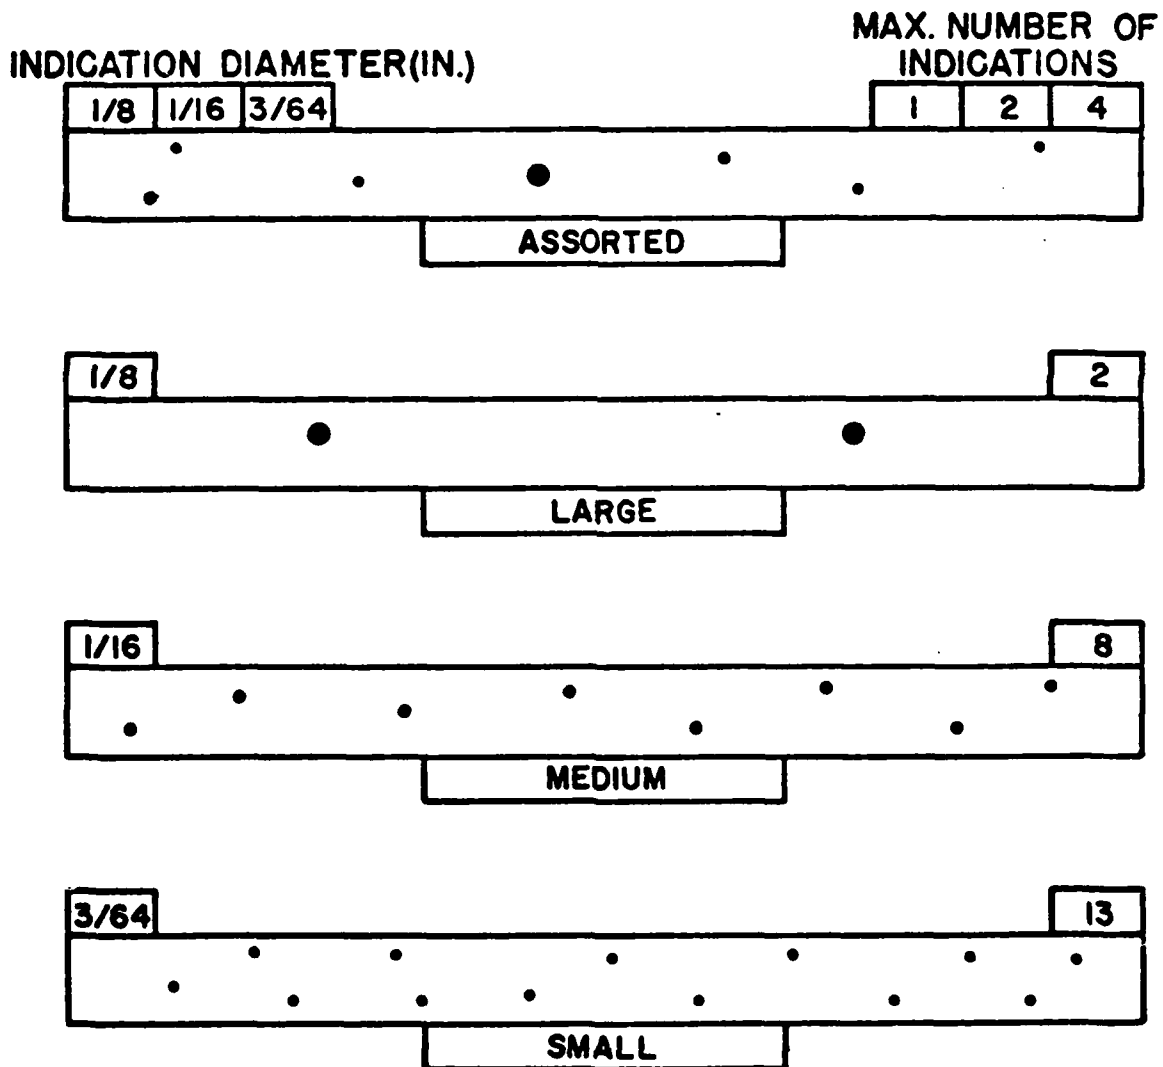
Class 3 Weld Surface Inspection Standards for Scattered Rounded or Non-Linear Indications (Sheet 3 of 6).
